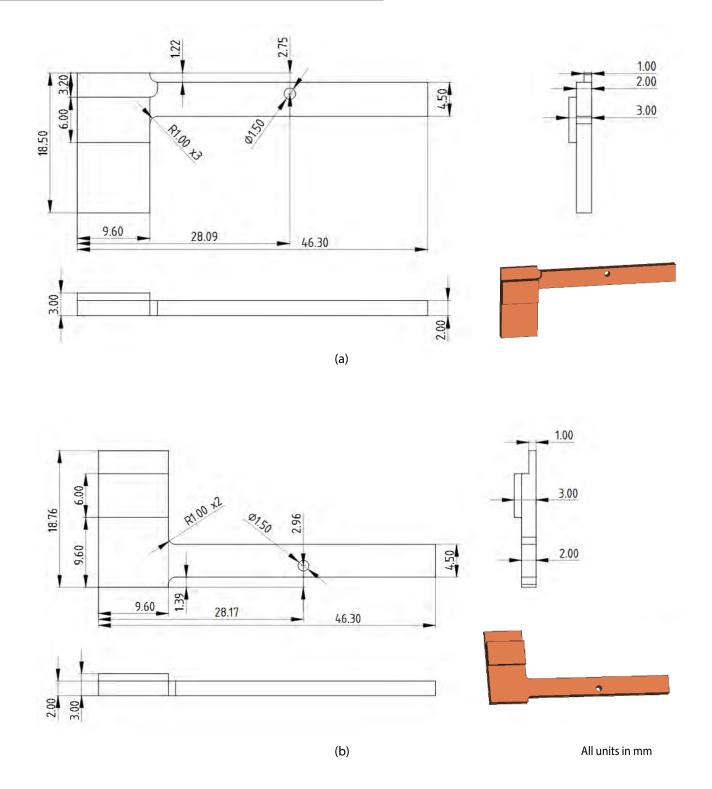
(a) Top side copper heat-spreader, (b) Bottom side copper heat-spreader
